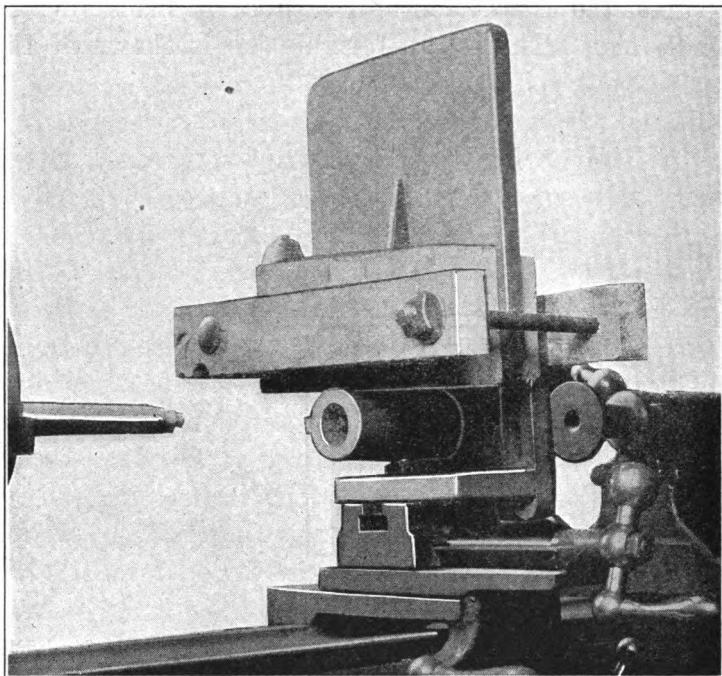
The drilling table of the drill press mounted in the lathe for boring
